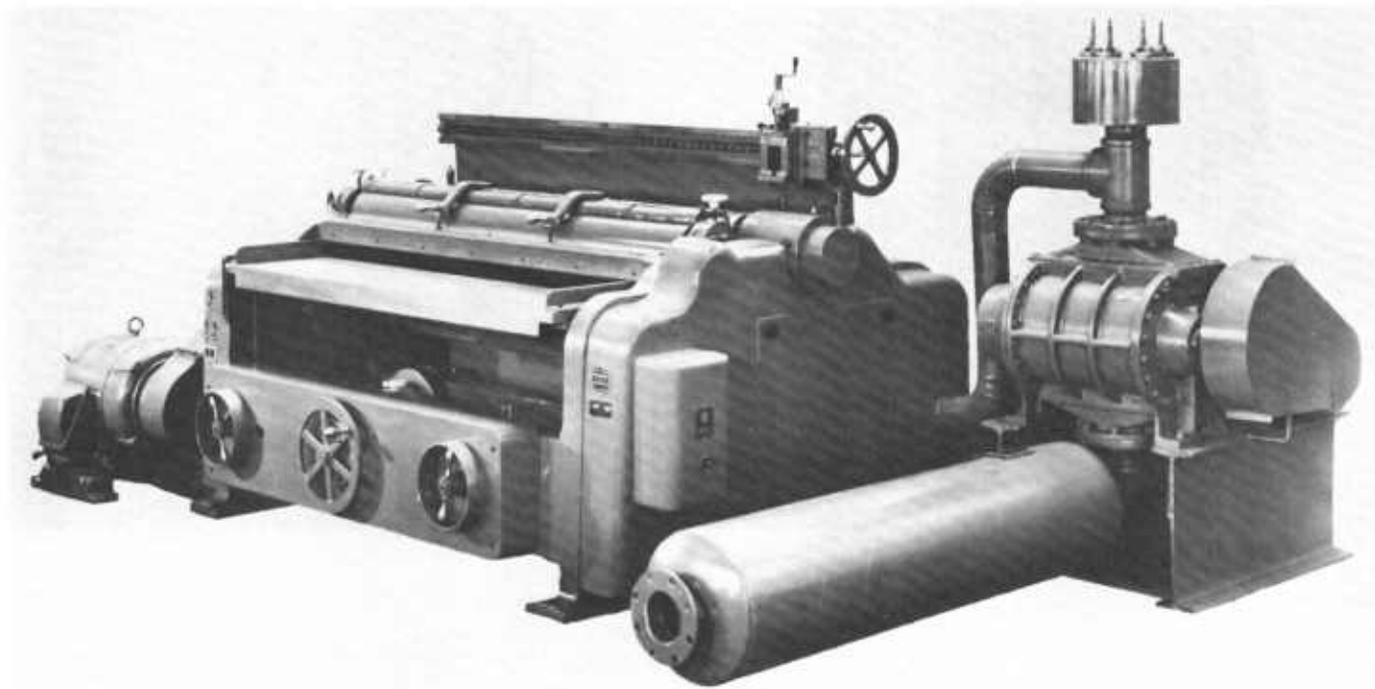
Buss Micro Surfacer. A 52-in-wide single surfacer equipped with carbide knives and vacuum bed (note vacuum pump at right) (Buss).
